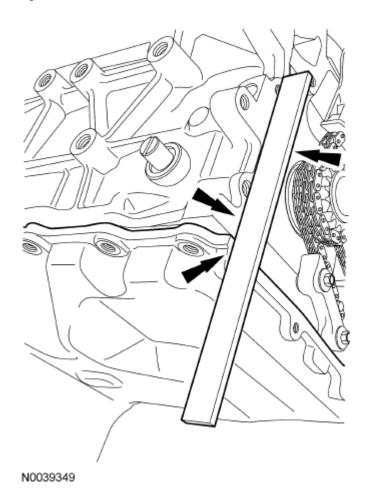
Aligning Front Surface Of Oil Pan Flush With Front Surface Of Engine Block Courtesy of FORD MOTOR CO.
